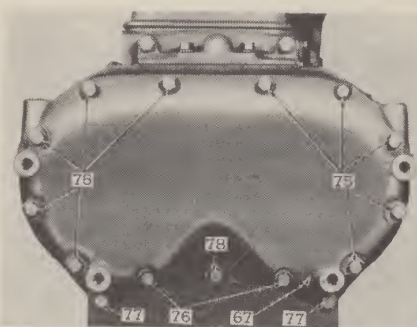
C — GM engine balance weight cover which is located on front of engine.
